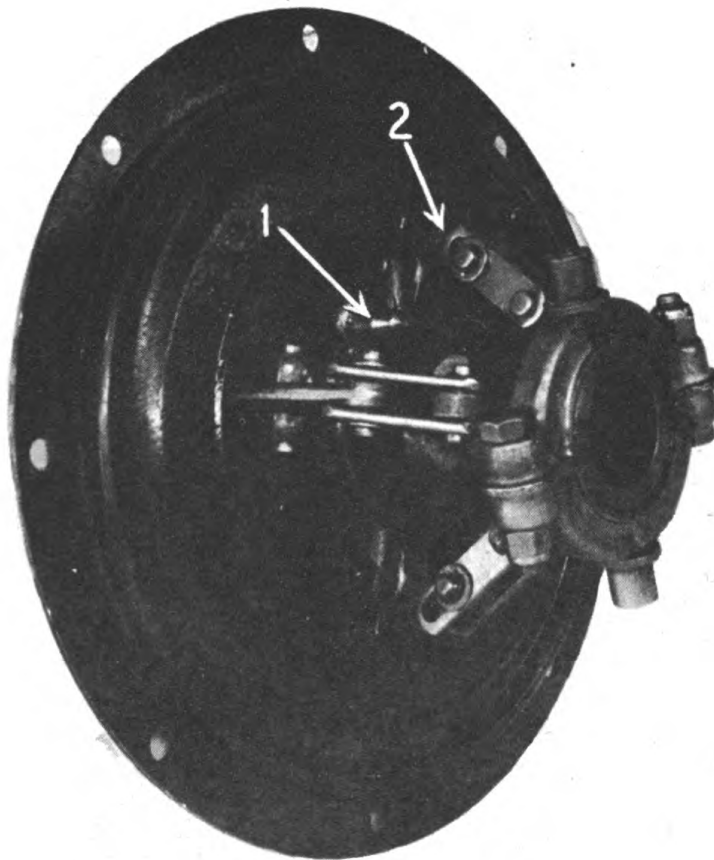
MASTER CLUTCH ADJUSTMENT.
